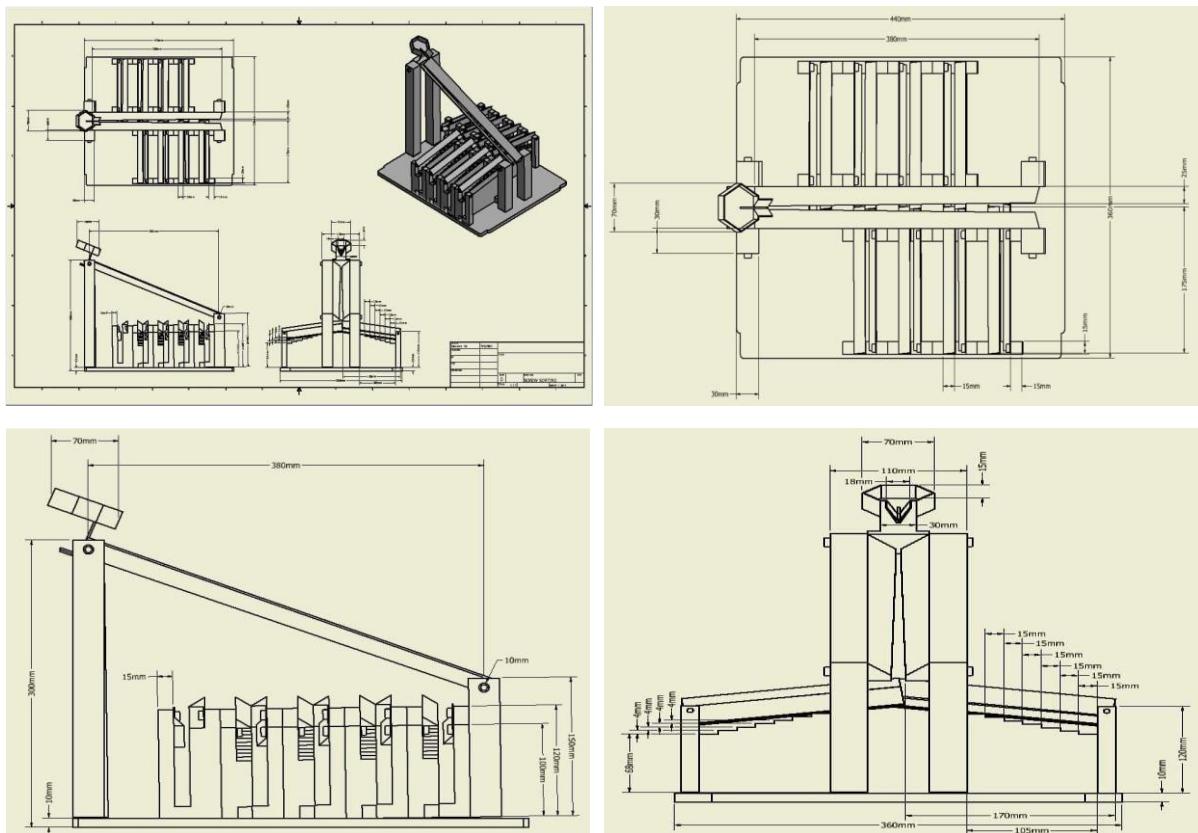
Technical drawing of the screw sorting machine showing multi-view projections and dimensions.
